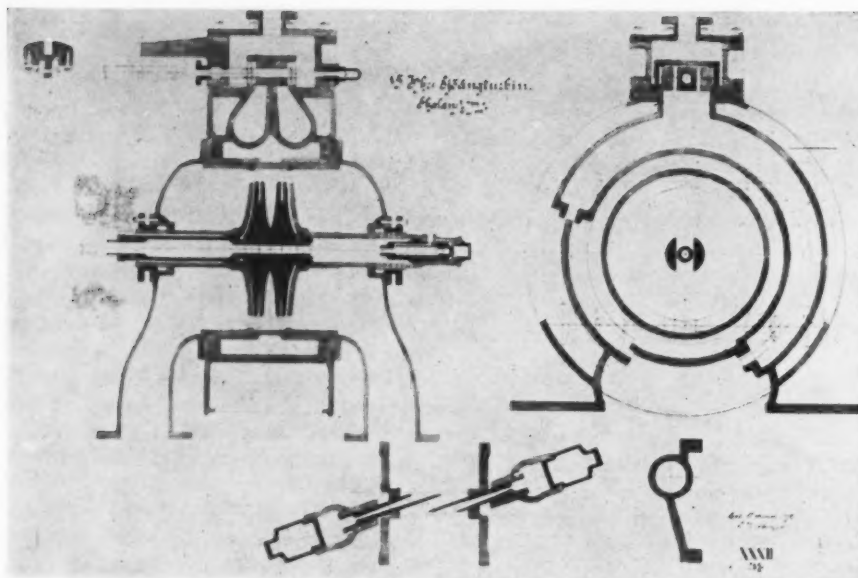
GEARED MARINE TURBINE WITH REVERSING WHEEL
